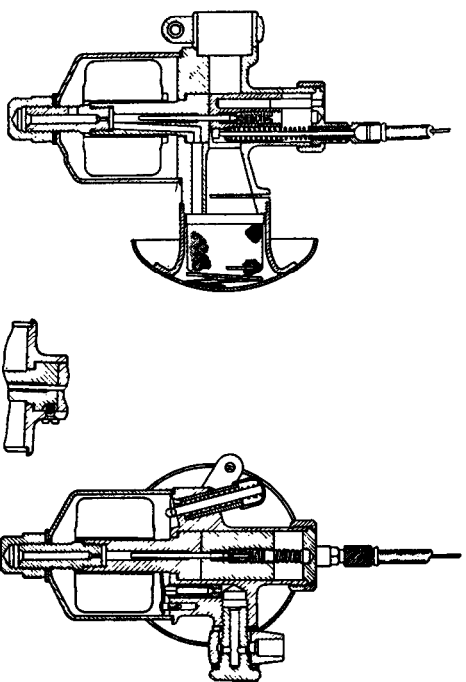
SECTIONAL ARRANGEMENTS OF JUNIOR CARBURETTER.
